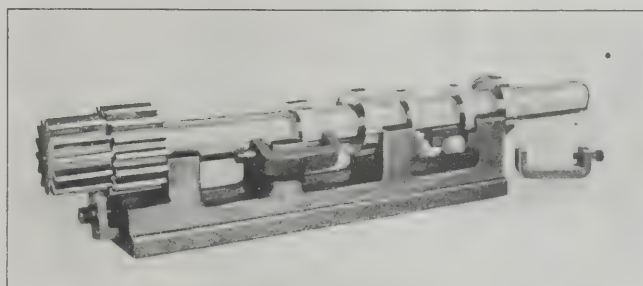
Jig for Drilling Pin-holes in Collars on their Shaft, to insure Interchangeability
